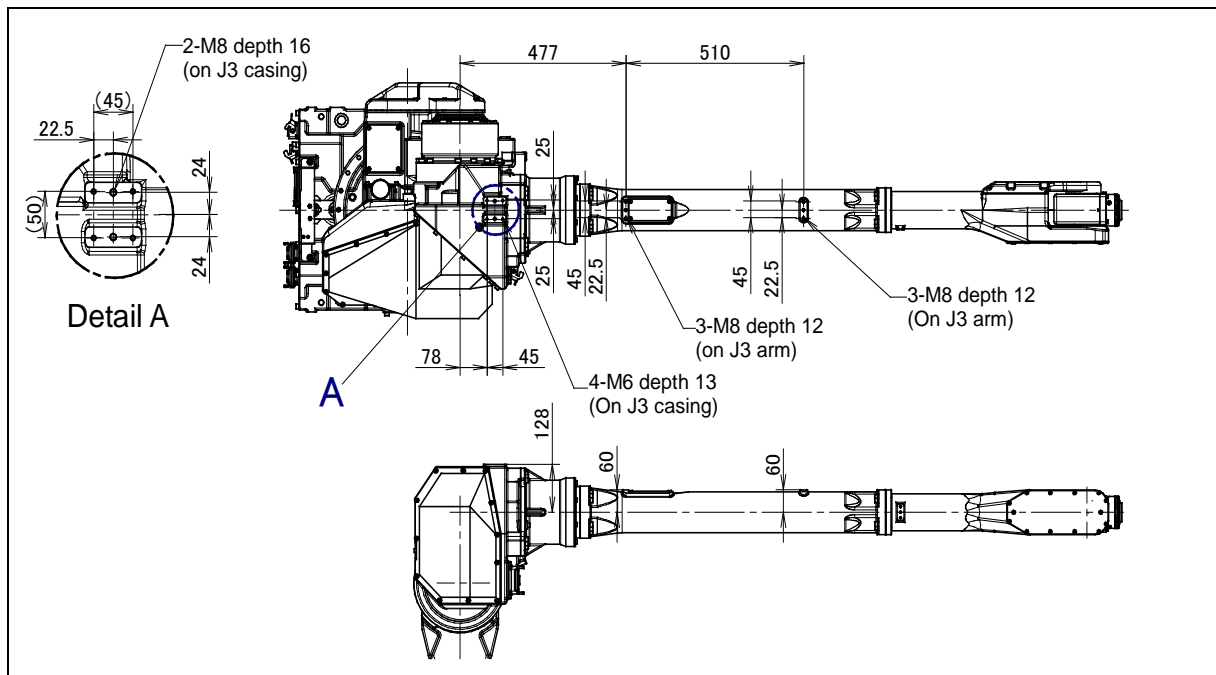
(a) Equipment mounting surfaces (M-710iC/20L)
